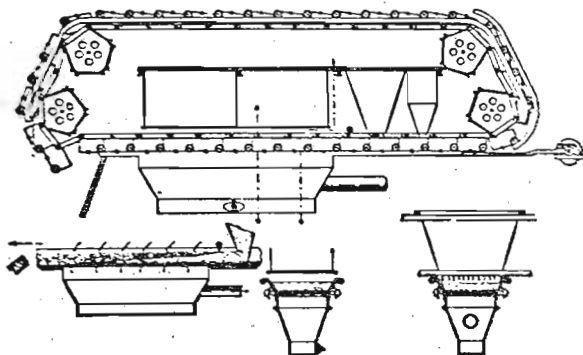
The first commercially operated Dwight-Lloyd machine, June 1906.
